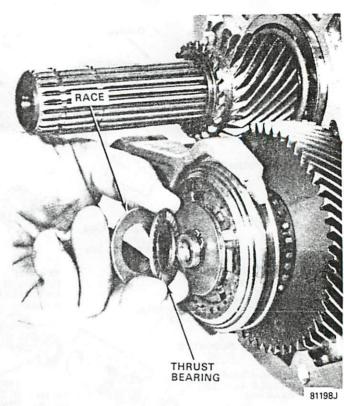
B-41 Countershaft Thrust Bearing and Race Removal/Installation
